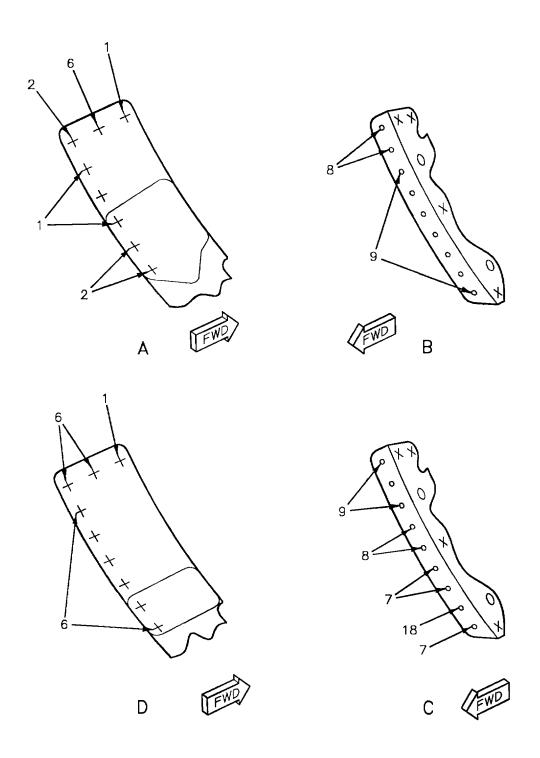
Former, 74A313188, Fastener Index (Sheet 3)
